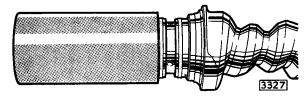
The valve and compressor (Tool J.33 in position)
